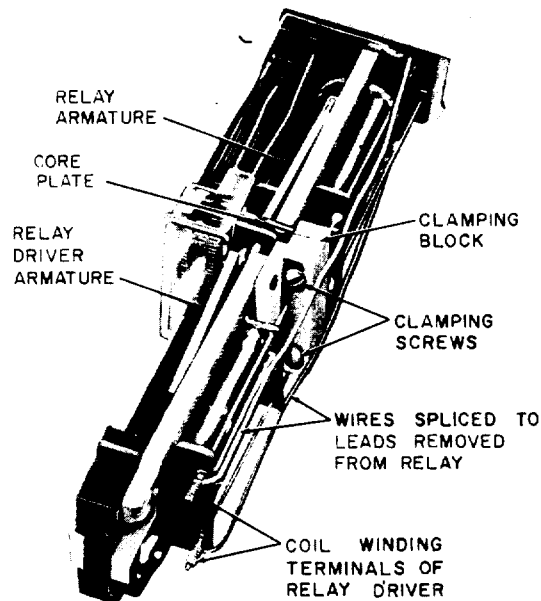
Relay Driver Mounted on AJ-Type Relay
